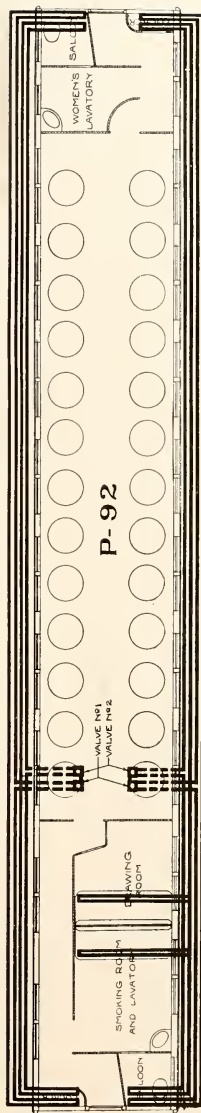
Arrangement of heating coils and cut-out valves in a Pullman chair car.
